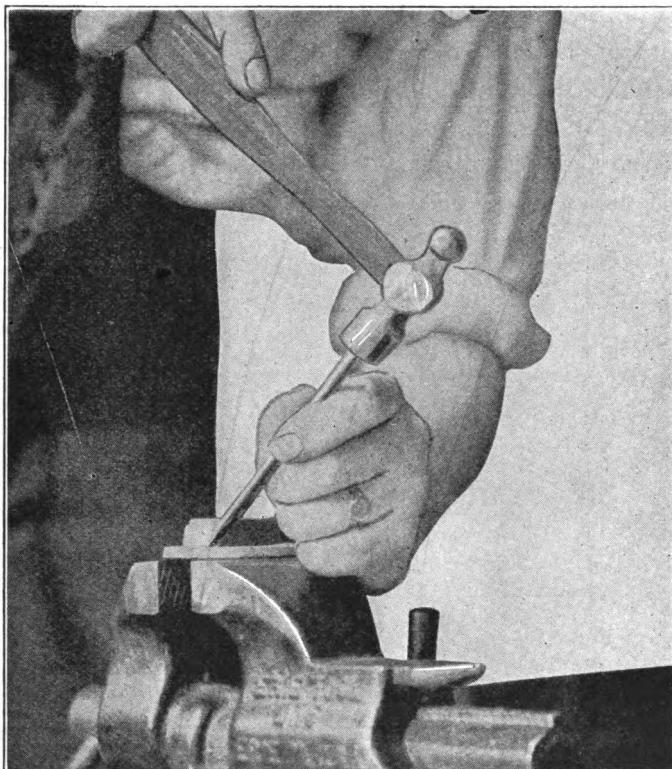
Using a small chisel in removing superfluous metal from a small casting
